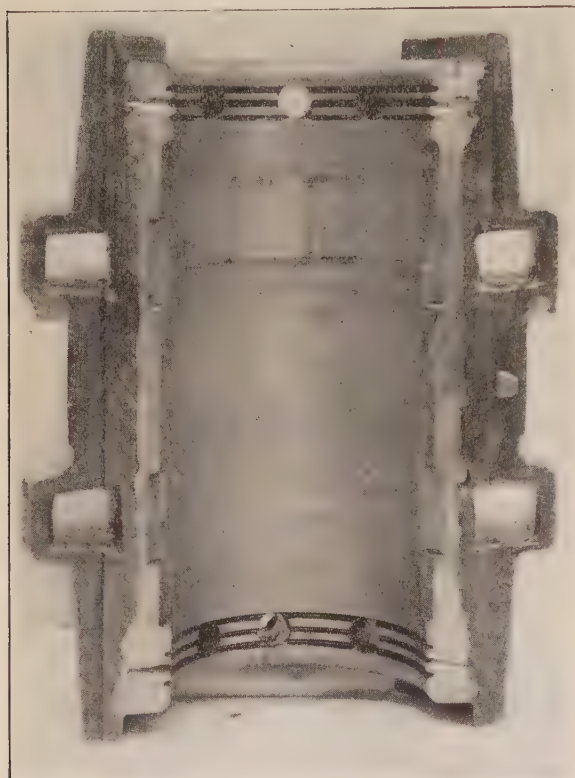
PHOTOGRAPH OF DAMAGED BEARING OF 500-H. P. INDUCTION MOTOR
